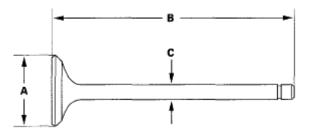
Measuring Valve Dimension Courtesy of AMERICAN HONDA MOTOR CO., INC.
